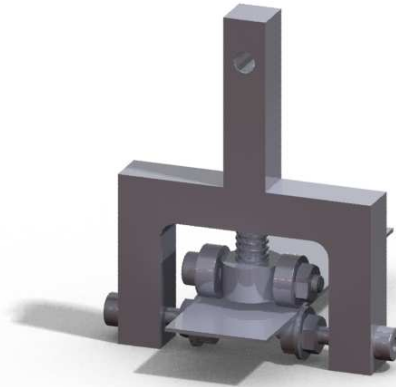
Detail view of the clamping mechanism of prototype A2.1.
